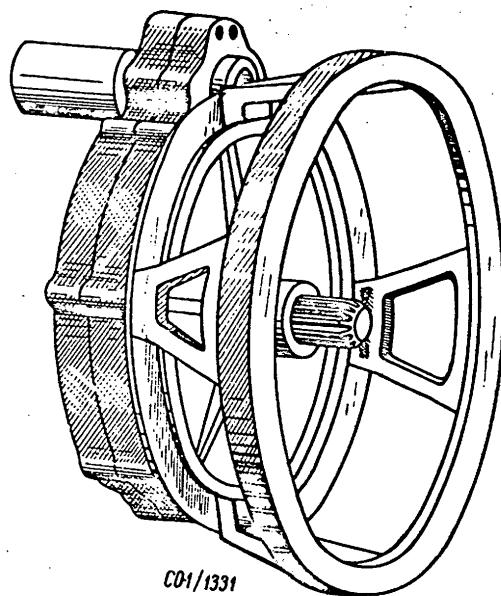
REDUCING UNIT FOR TIGHTENING DIFFERENTIAL SHAFT COUPLING BOLT
